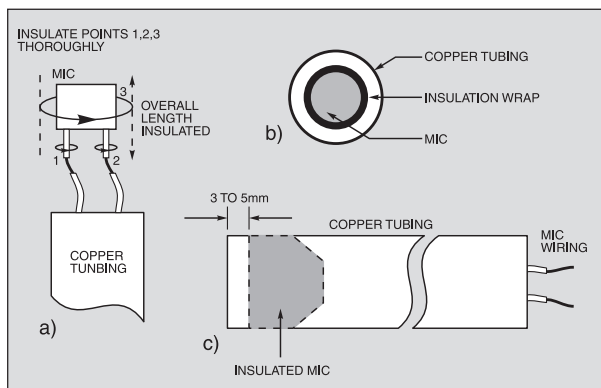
Insulating and wiring the microphone insert (a), end view showing insert "plugged" into the copper pipe (b) and the Mic. insert recessed in the copper tubing (c)
